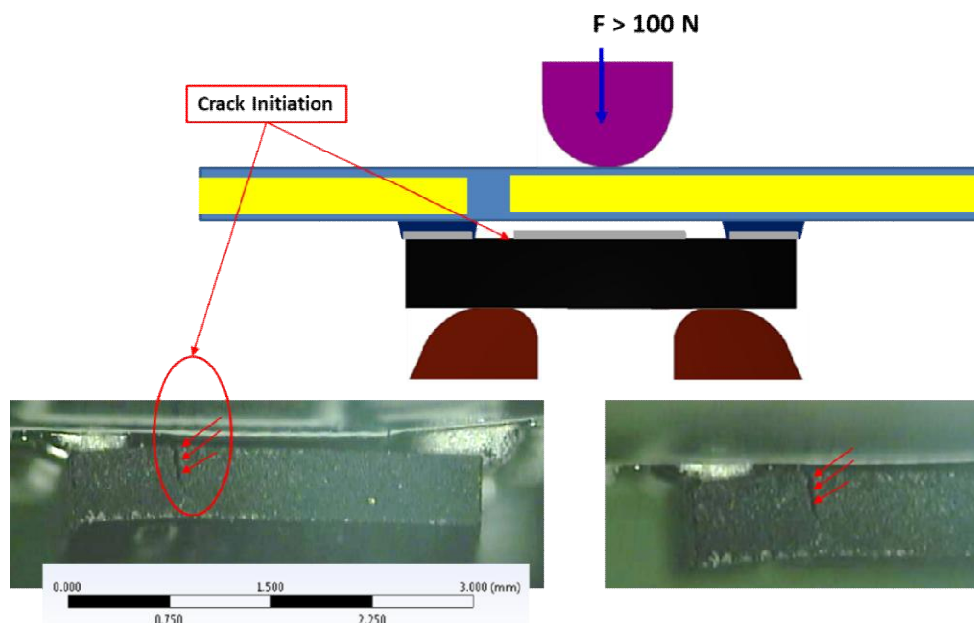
Crack signatures for the tested package soldered on PCB in Fig. 6b
